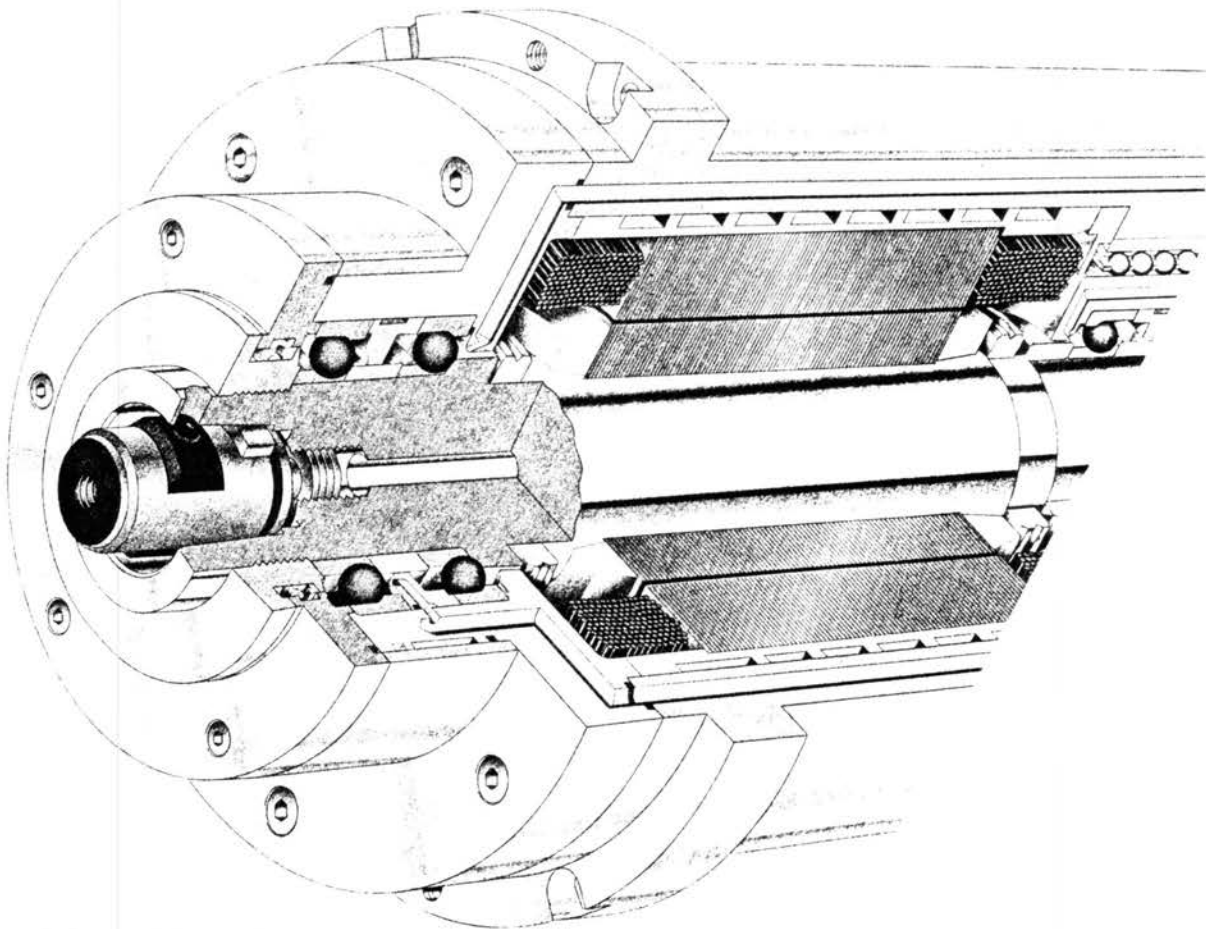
High-speed spindle unit with hybrid ceramic bearings (from HSK), for precision high speed cutting machines.
